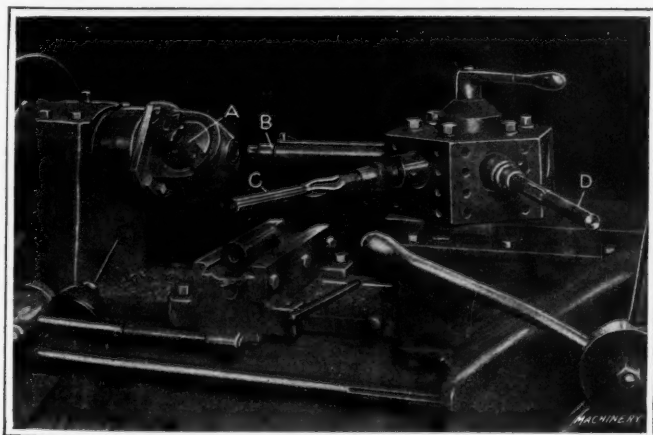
No. 5 Bardons & Oliver Turret Lathe tooled up for reaming Wrist-pin Hole in Pistons
